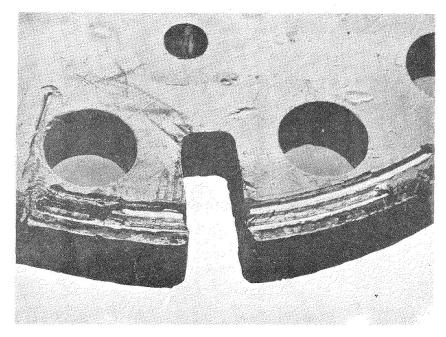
SHOWING SCORE MARKS ON BOTH SIDES OF LOCKING SLOT OF ELEVATOR DATUM LEVER
